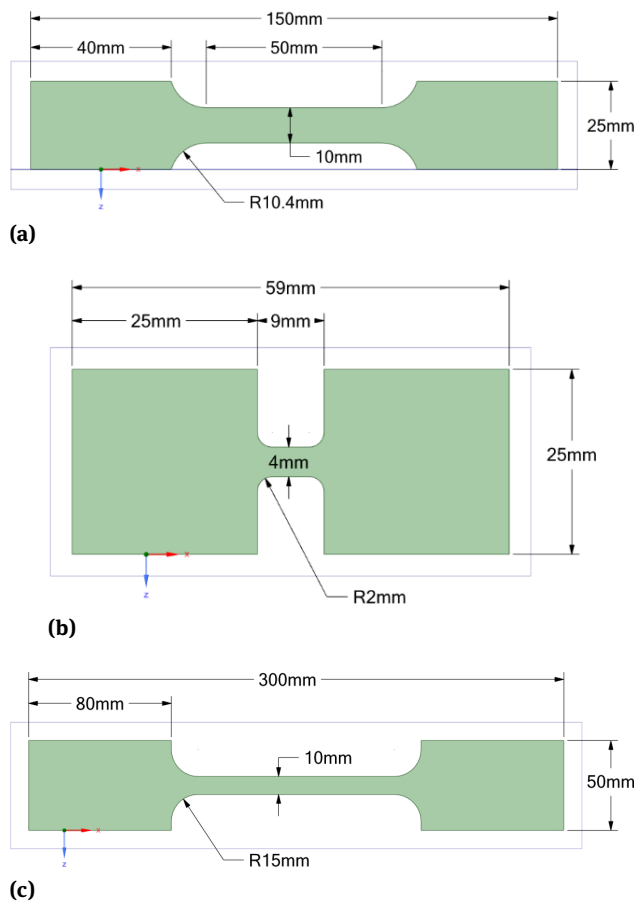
The geometry of specimen tested: (a) Specimen 1; (b) Specimen 2; (c) Specimen 3
